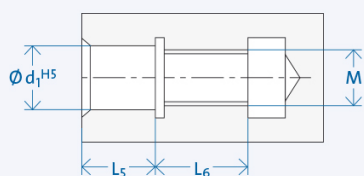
FOR GRINDING WHEELS ON THREADED PIN (PL)\
